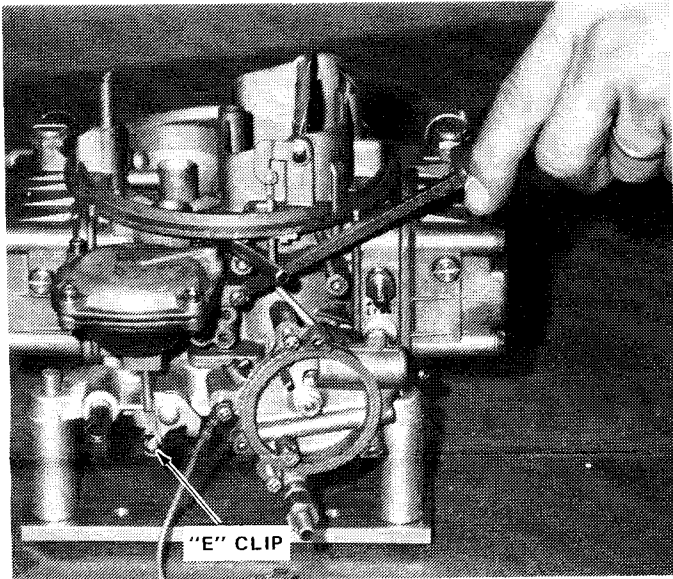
With choke housing swung out of way, remove 3 screws holding secondary throttle diaphragm assembly. Remove "E" clip at throttle lever.
